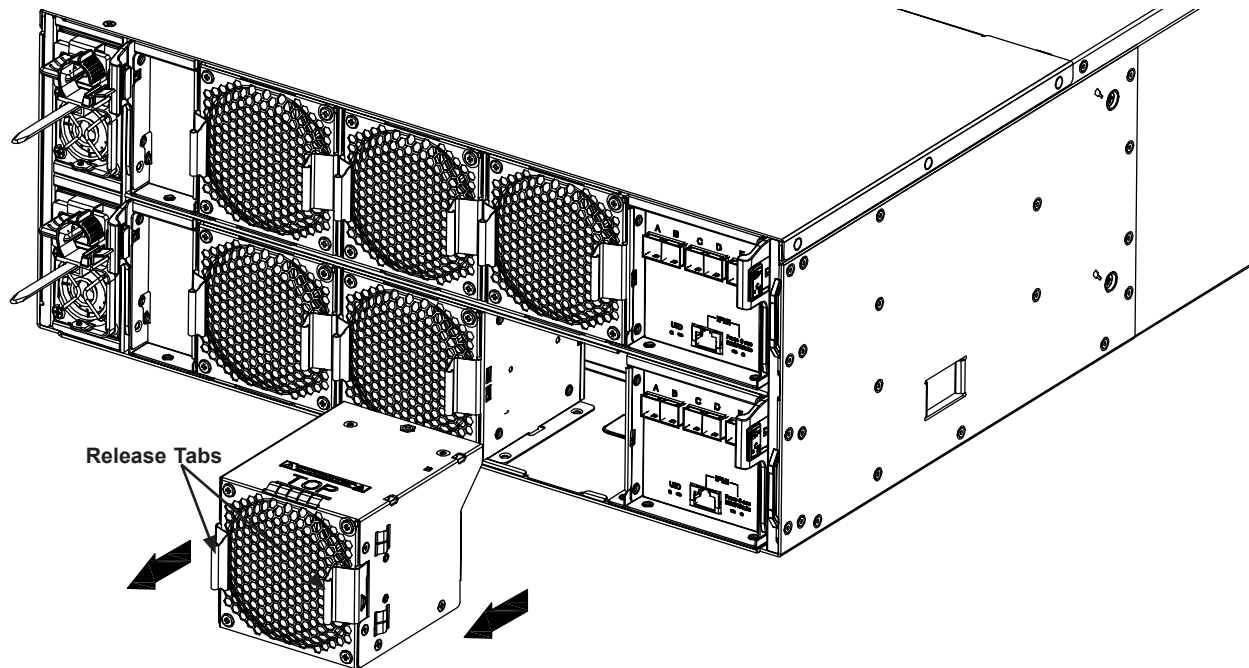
Removing a Fan or Drive from a Motherboard Sled
